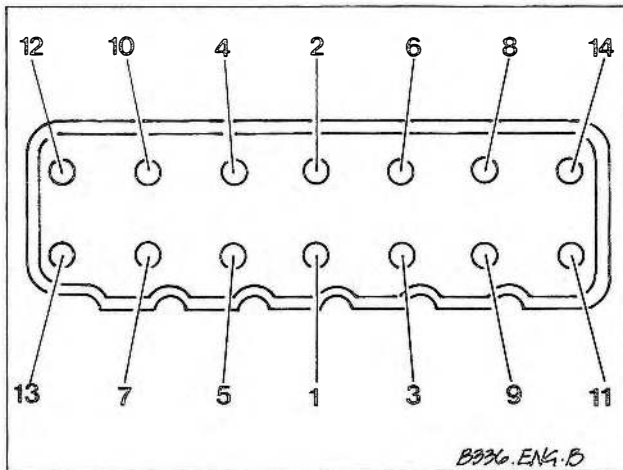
Cylinder head bolt tightening sequence for 6-cylinder engine.
